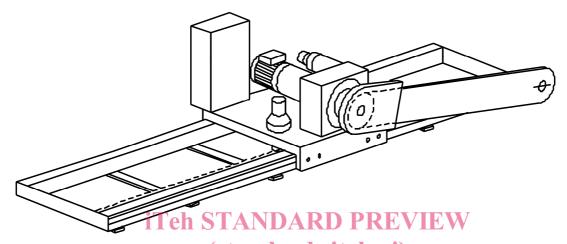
Transportable chain or belt-slotting machine for open-cast quarries
